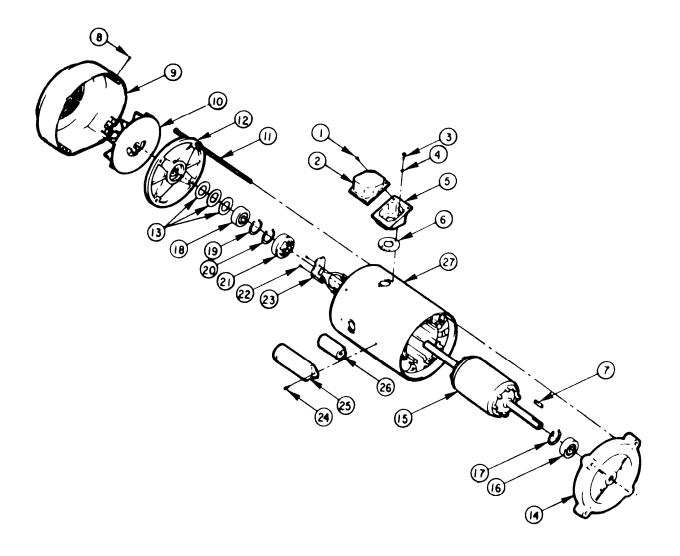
Chemical Feed Pump Motor Assembly (Army)
